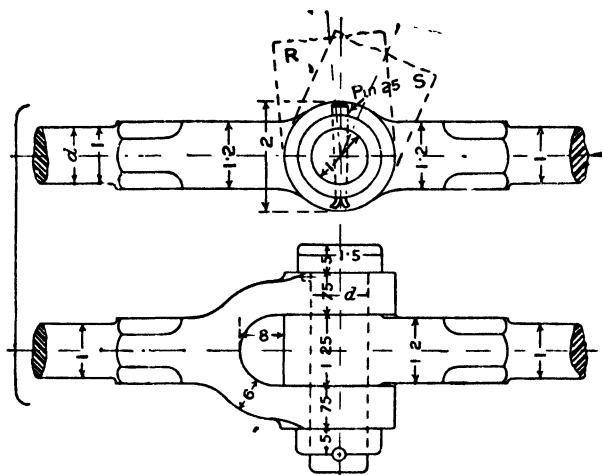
& 512 PIN JOINT FOR VALVE ROD
